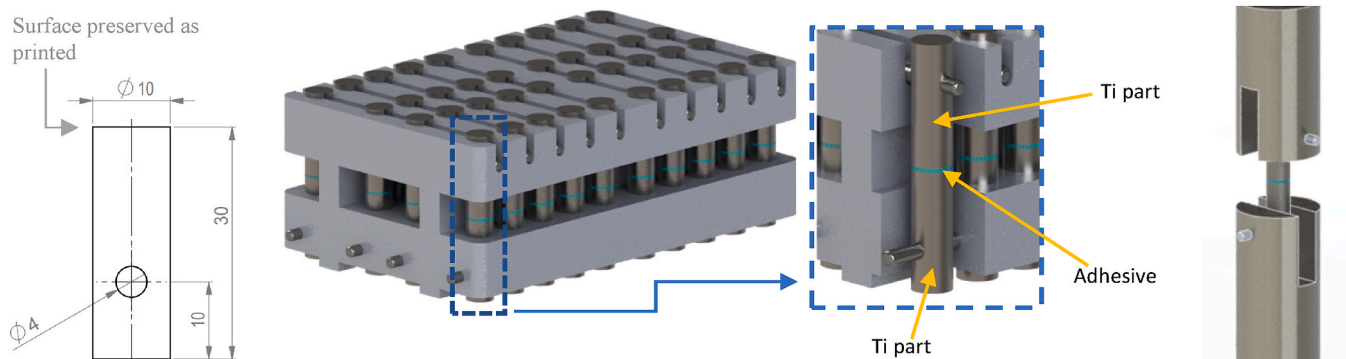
(a) Titanium adherend with dimensions, (b) Alignment device showing in the section view of a bonded sample, (c) Tensile test setup.
